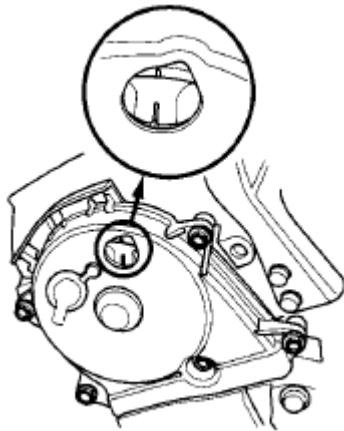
Identifying Camshaft Pulley Marks - Rear
